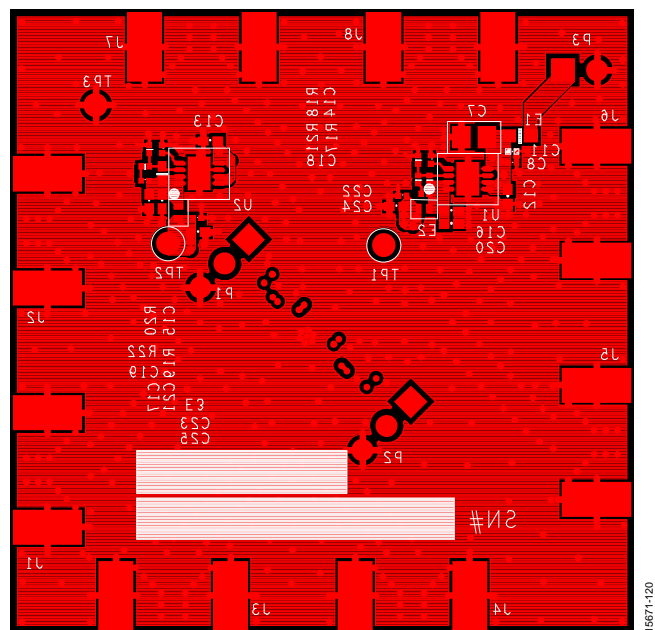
Layout of the ADL5569-EVALZ Evaluation Board, Bottom Layer
